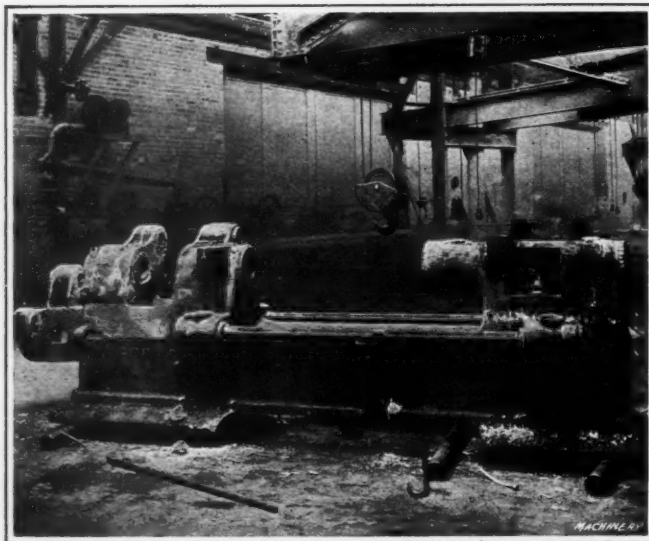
Finished Lathe Bed as it appeared immediately after Removal of Assembling Jig
